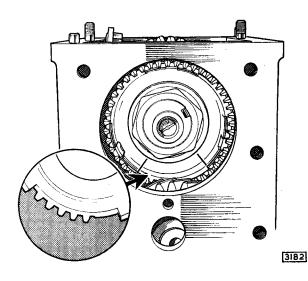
Rotate the mainshaft until one of the cut-away portions of the 3rd/top synchro hub is in line with the counter shaft.
